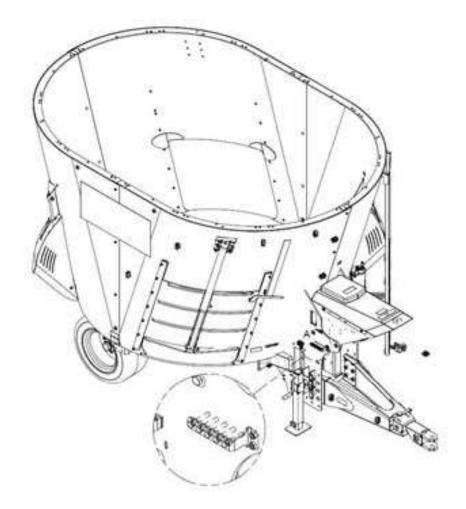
Location of the Shear Bolts on the A280 and A380 SMARTMIX
